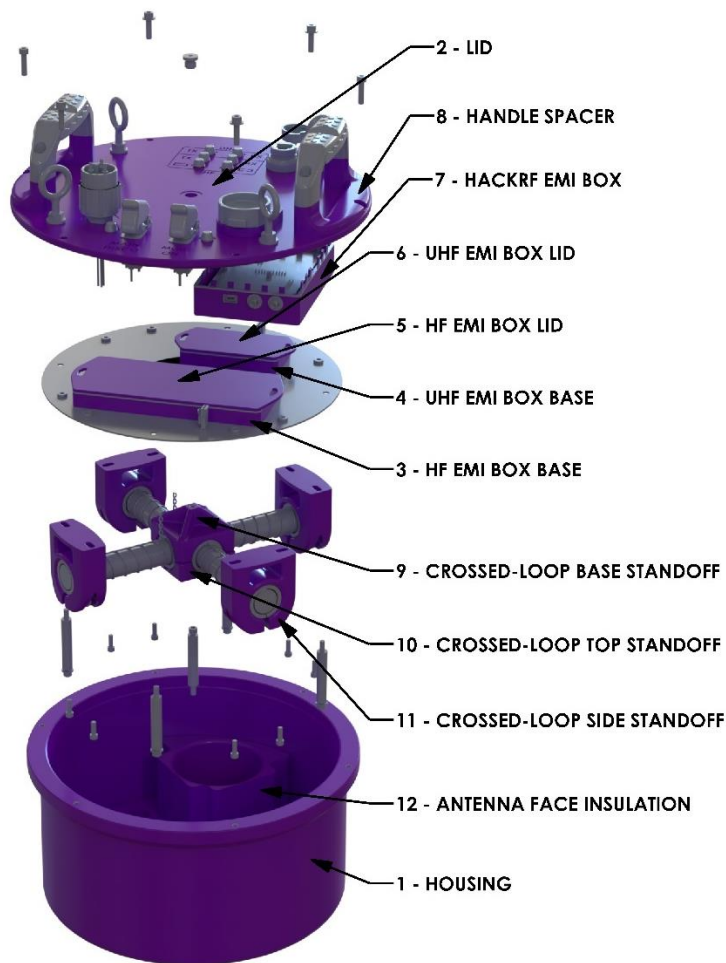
Exploded view of the puck assembly, showing the custom mechanical components in purple
